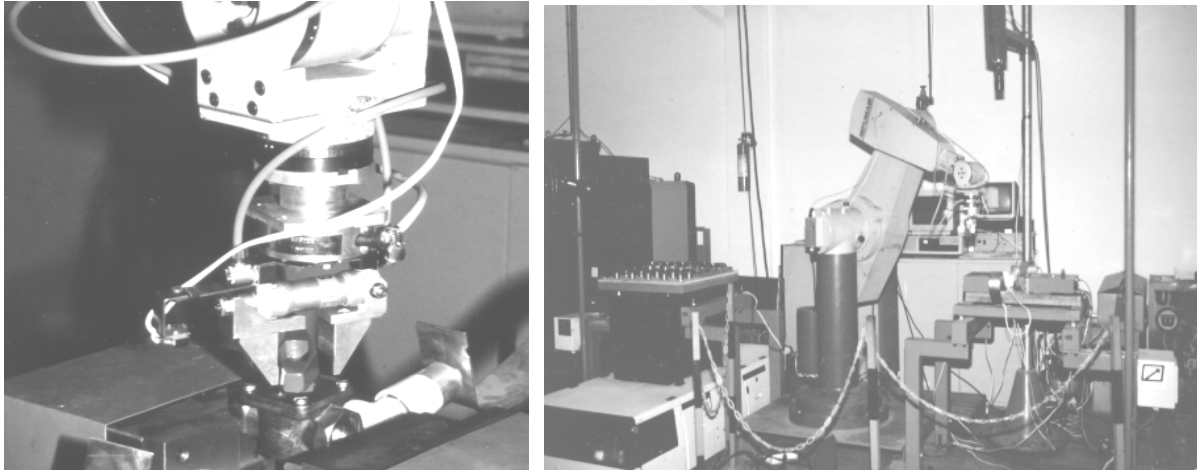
Robotized assembly of ball tap and the assembly cell with PUMA 760 robot
